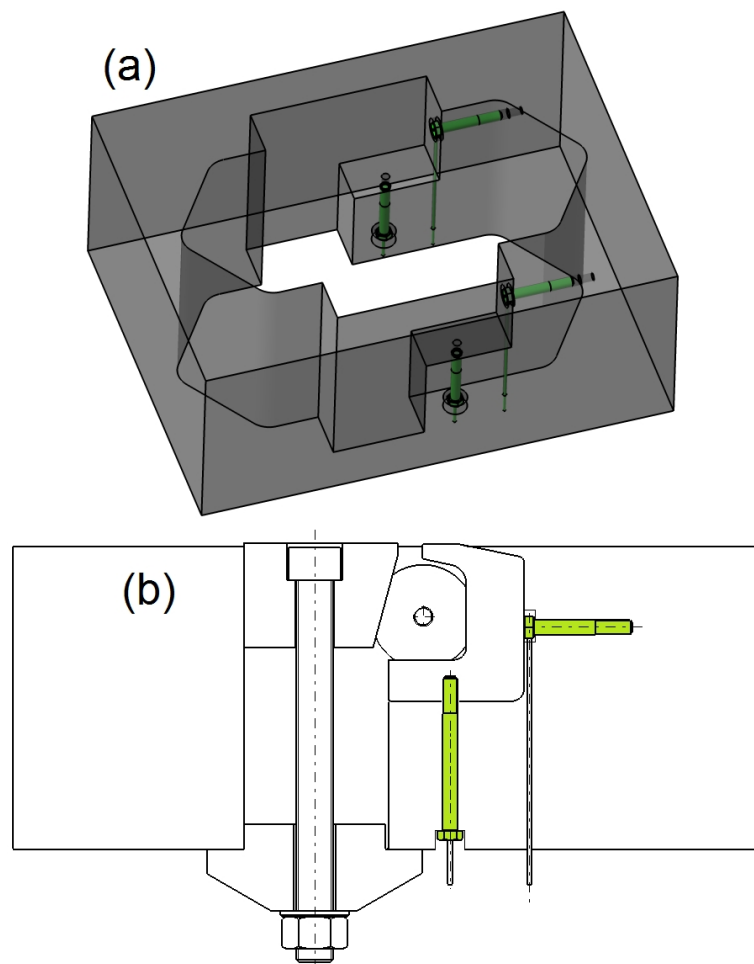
Possible sensor layout for Wedge-Lock systems, (a) isometrical view, (b) cut view (Entacher and Galler 2013a)
